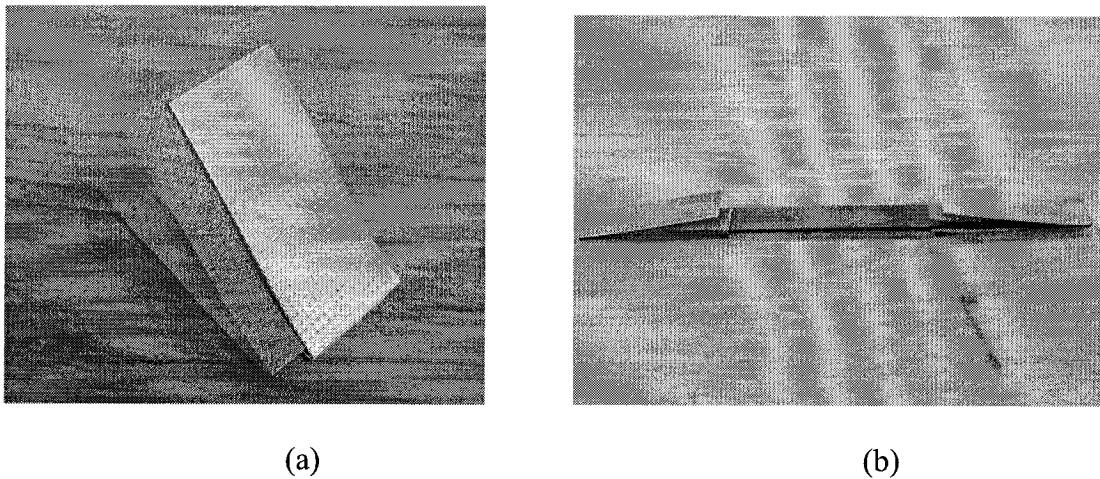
(a) Sequence of assembly of tabbing material (b) assembled tab.
